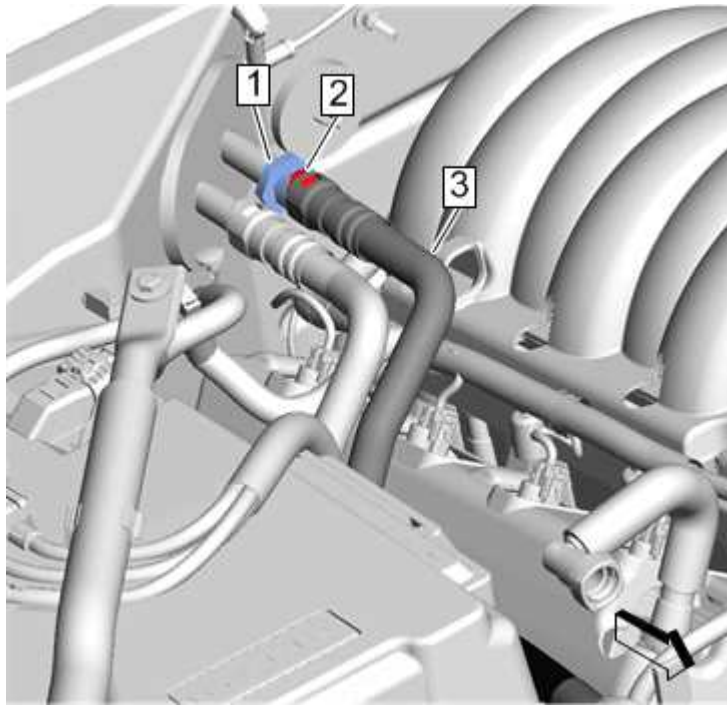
Heater Inlet Hose And Heater Core Inlet Tube
